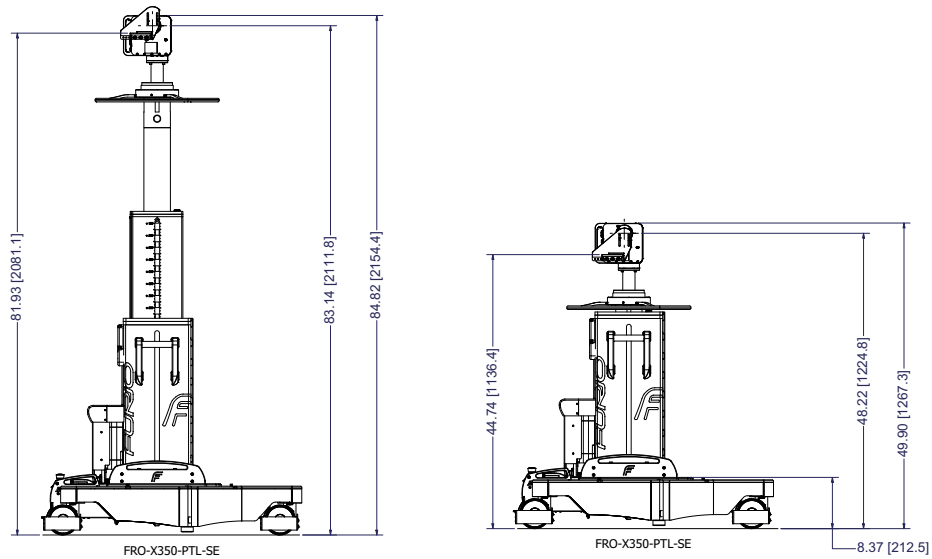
Dimensions of the BlackBird SE Pedestal with an X350 Head (side view)
